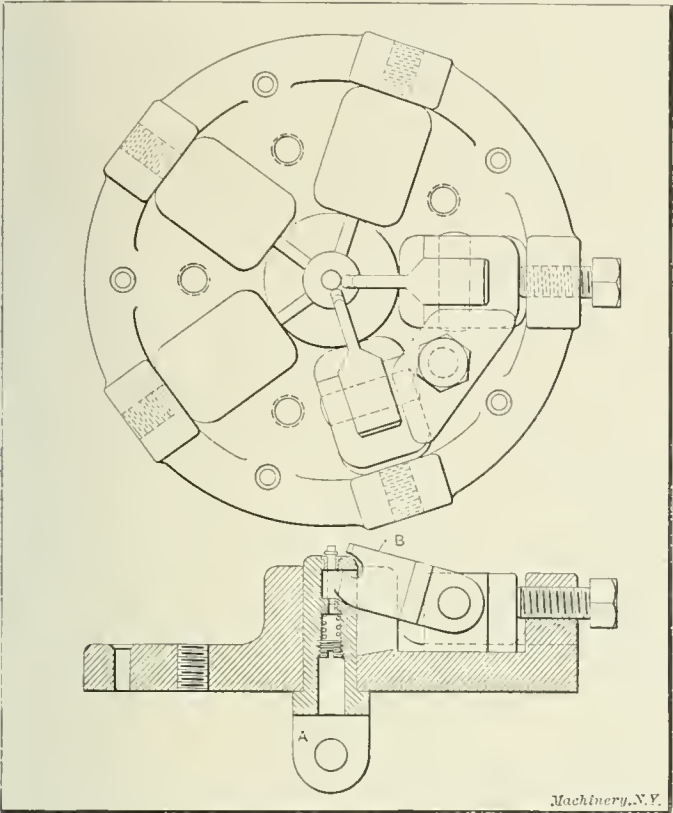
Construction of Sw: ging Machine shown in Fig. 18
